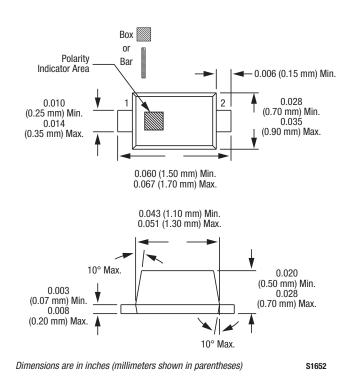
SMV1245-079LF SC-79 Package Dimensions
